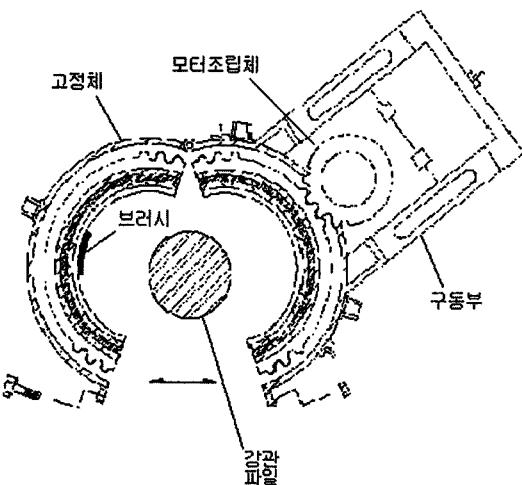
Section of the auto cleaning apparatus of a pillar.
